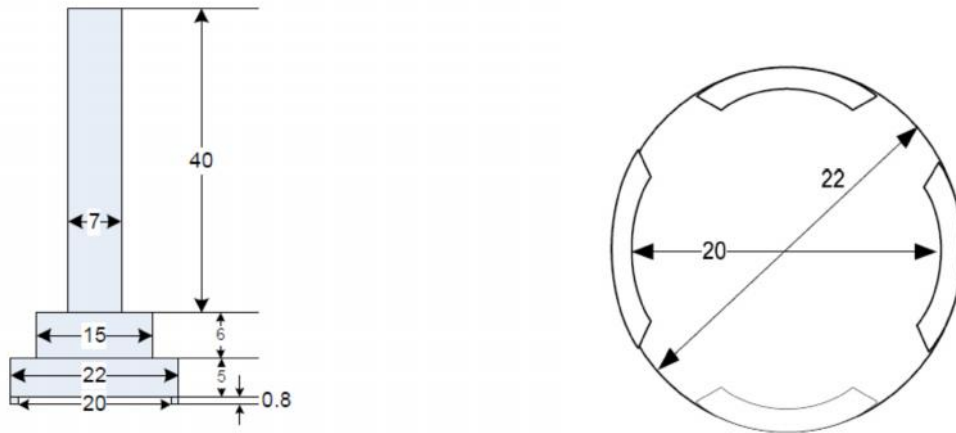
Pull-out Stub Dimensions (mm) for the BBS Test (Anon., 2009)
